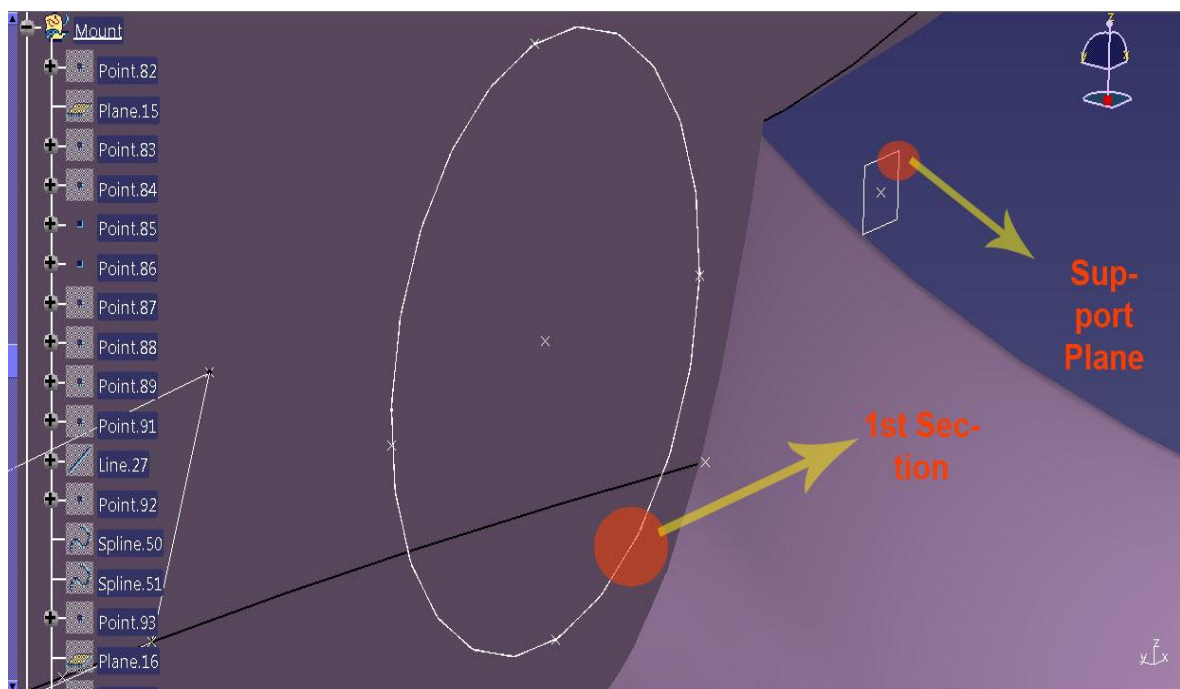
Regional surfaces of steering wheel pillar.
